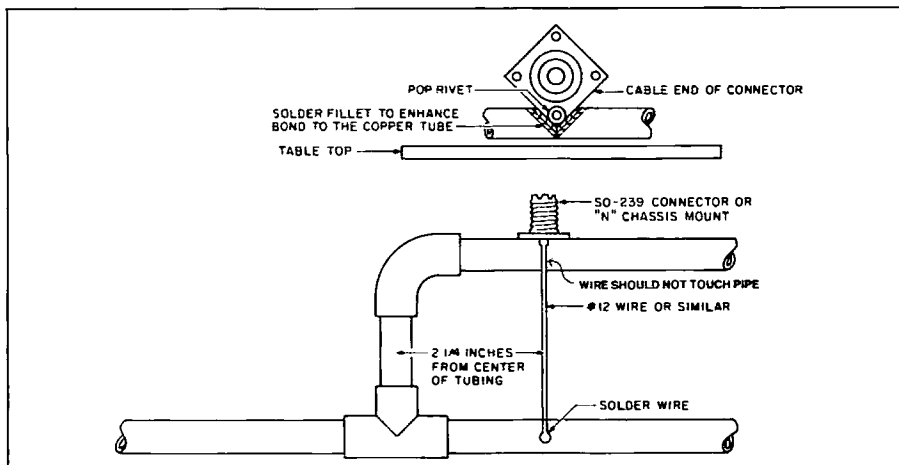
See the materials list. Before soldering, clean the joints and place the assembled antenna on a flat, nonflammable surface. Practice on some scraps of tubing and extra pipe joints if you're new to this. All dimensions are center-to-center.
